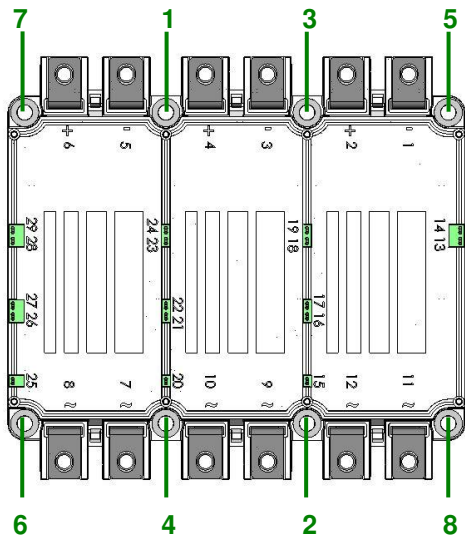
Assembly order of screws for "SEMiX 33c" case (assembly to the heat sink)
